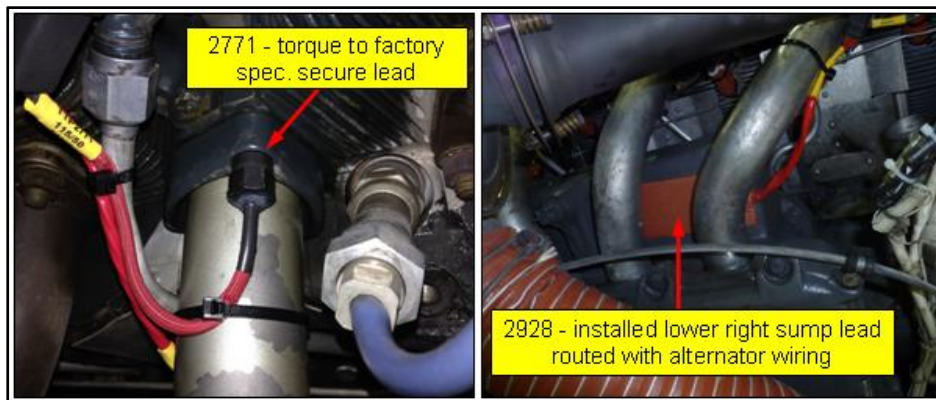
Threaded elements installed per instruction TN02771 without washers or spacers, torque to factory specification, and secure leads. Pad elements installed per instruction TN02788 using approved solvent wipe and bonding sealant.
